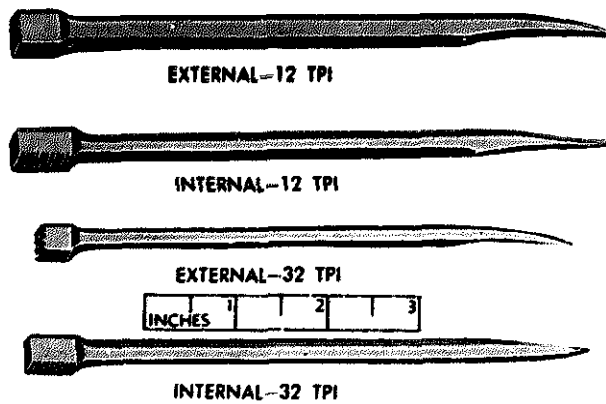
Thread chasers are used on damaged threads. They have several teeth, and the process of rethreading damaged threads is termed chasing.
